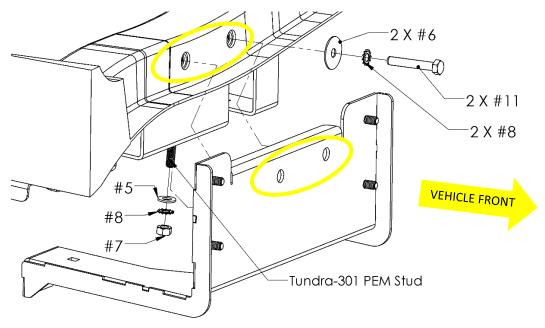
TUNDRA-201 to TUNDRA-301 Mounting with Hardware; Exploded View
